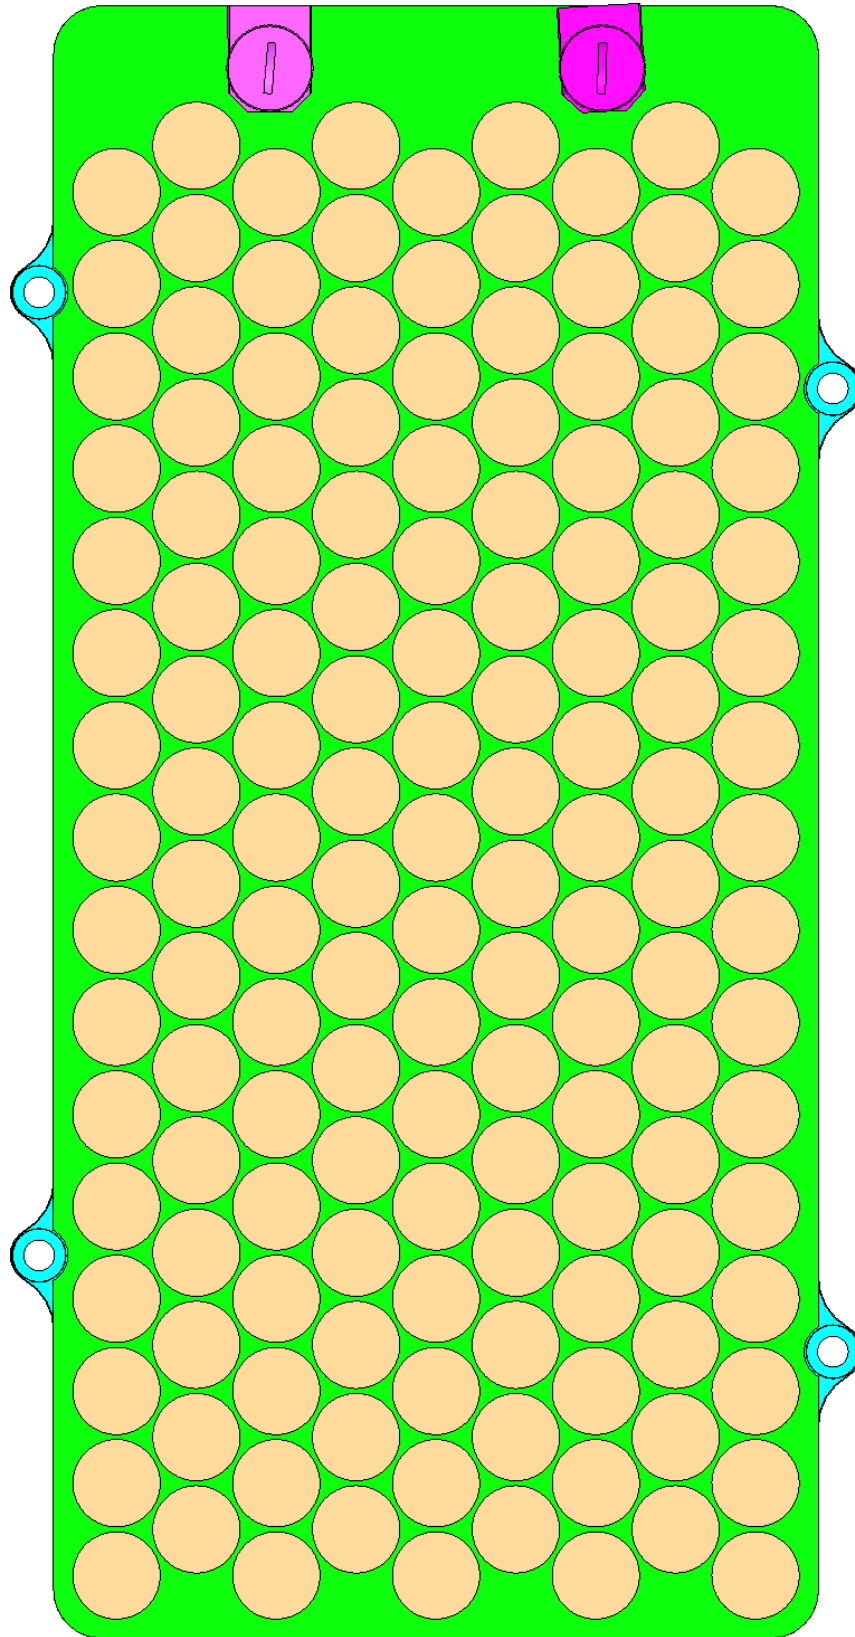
Top view of the cold plate assembly, showing the MCPCB etched with copper circles for soldering to individual qubits
